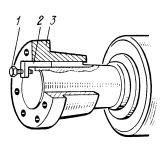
Tool for mounting the half-couplings on large-diameter shafts
